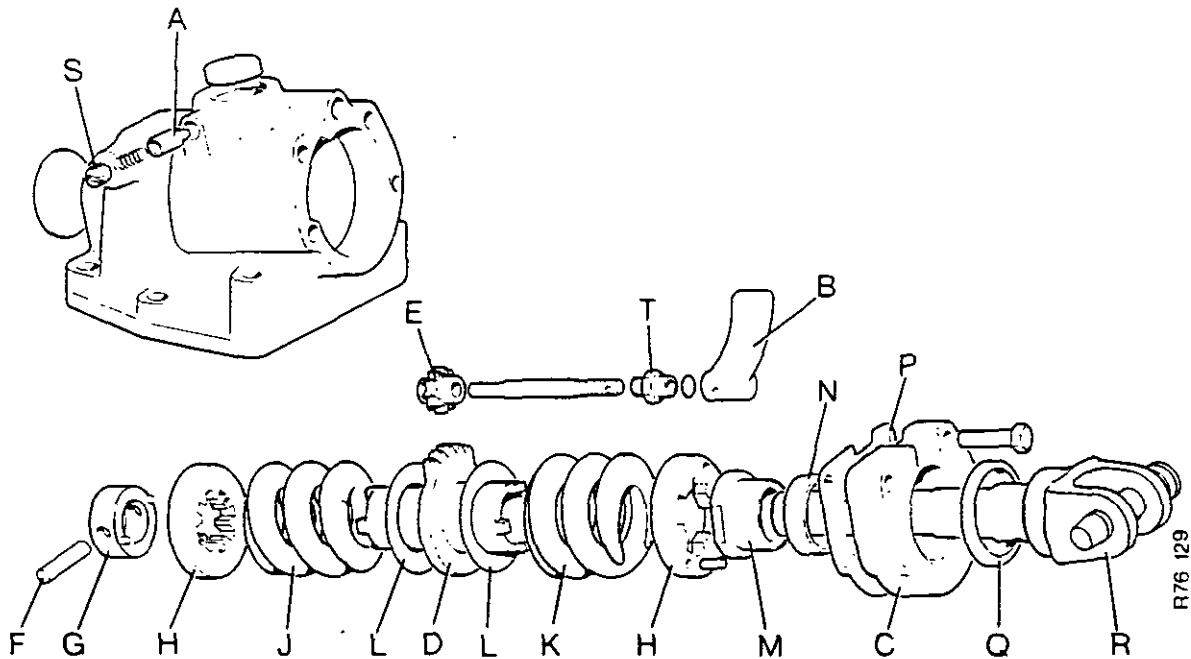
DISASSEMBLY OF THE SELECTIVE SENSING UNIT
